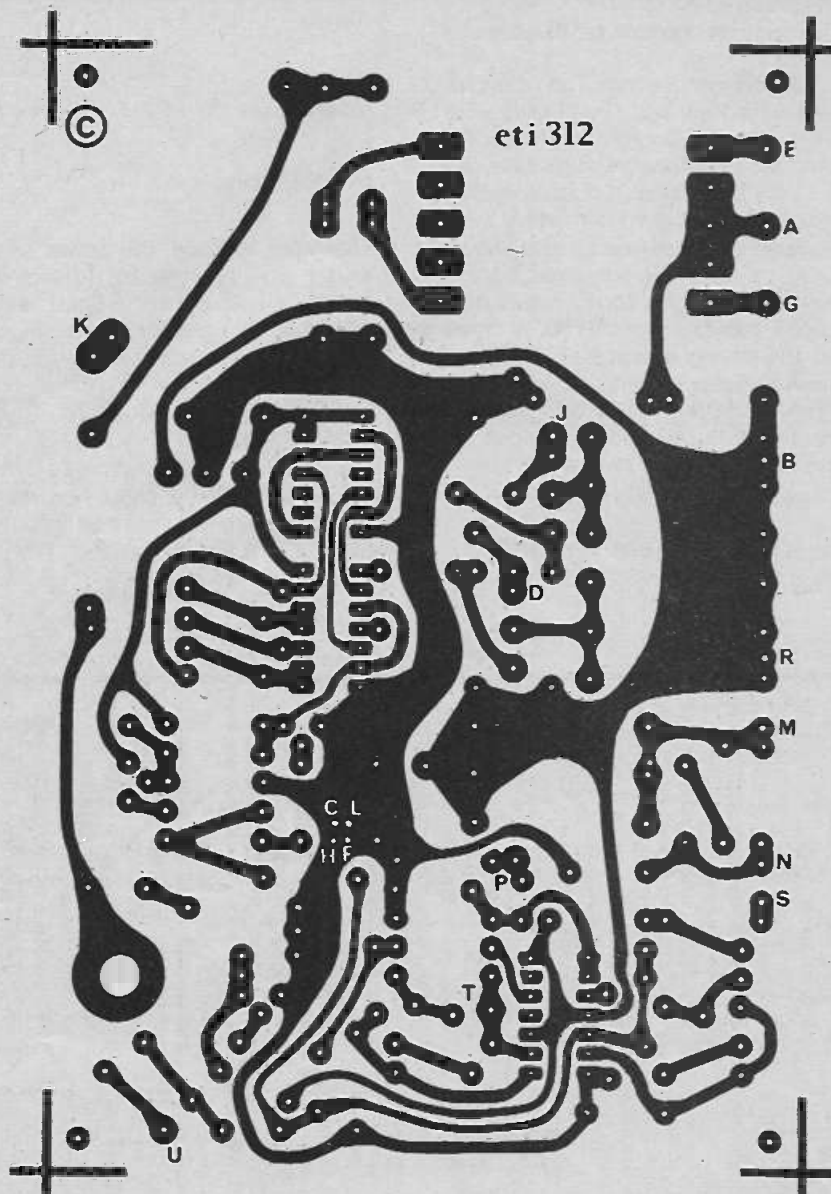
Printed circuit board layout. Full size 149 x 100 mm.
